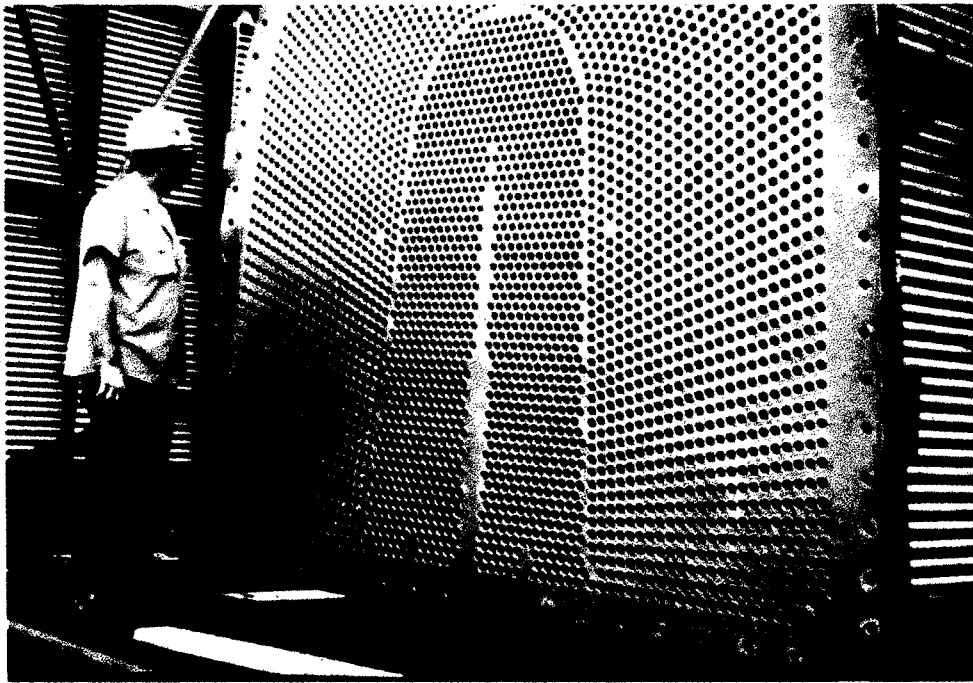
Titanium (1/4-Inch) Clad Steel (1 1/4-Inch) Condenser Sheet (Explosive Fabricators, Inc. photograph)
